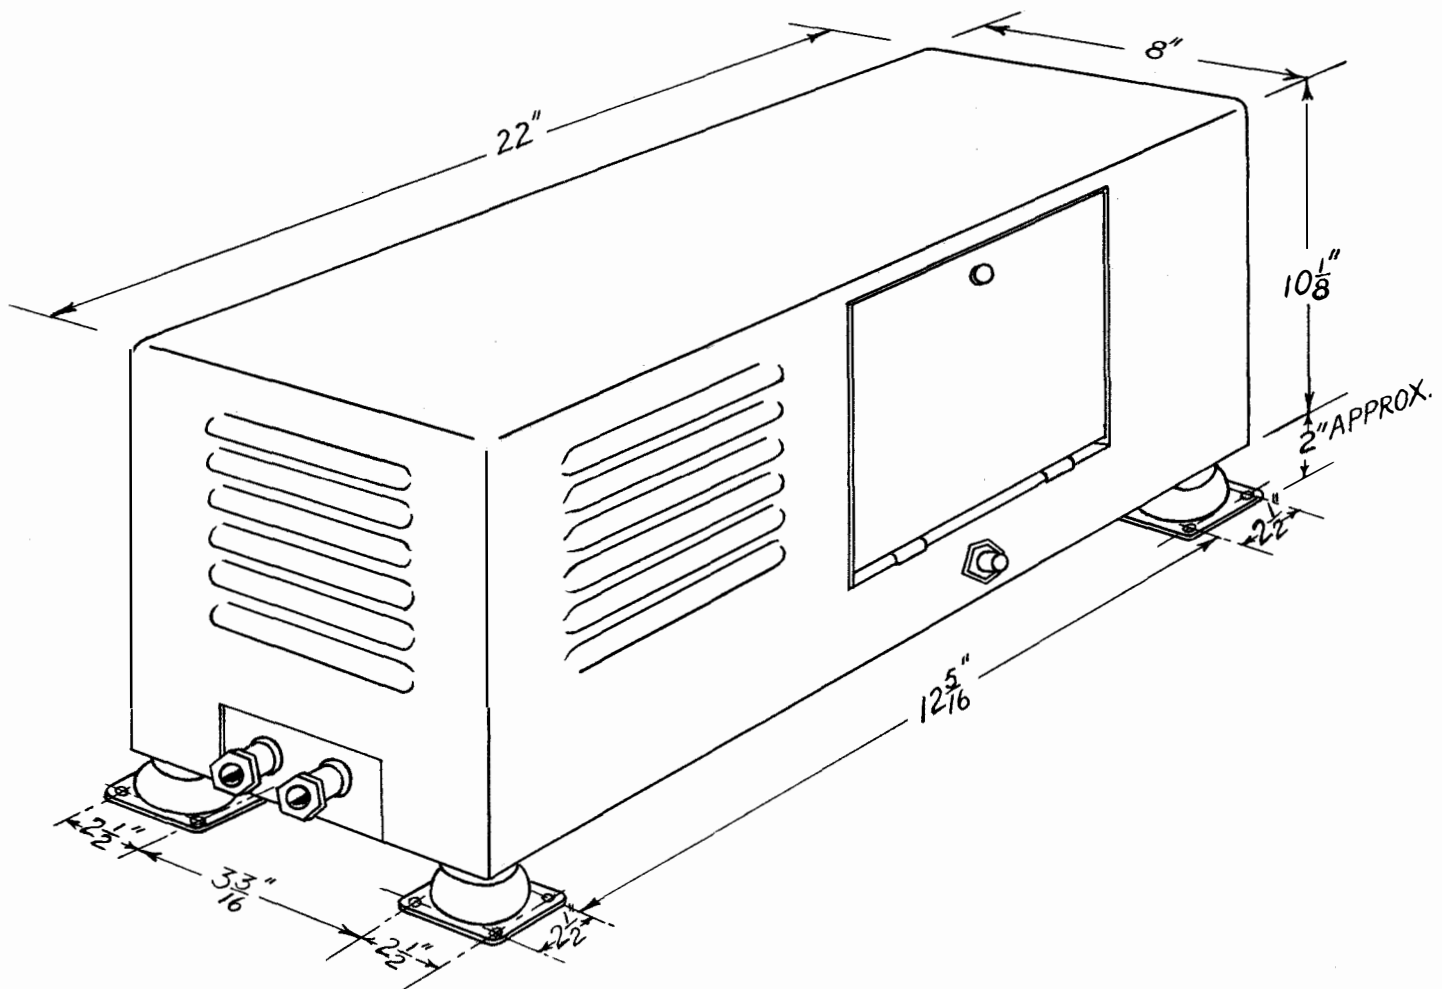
Power Supply PP-765/U Installation Base Plan Drawing.
